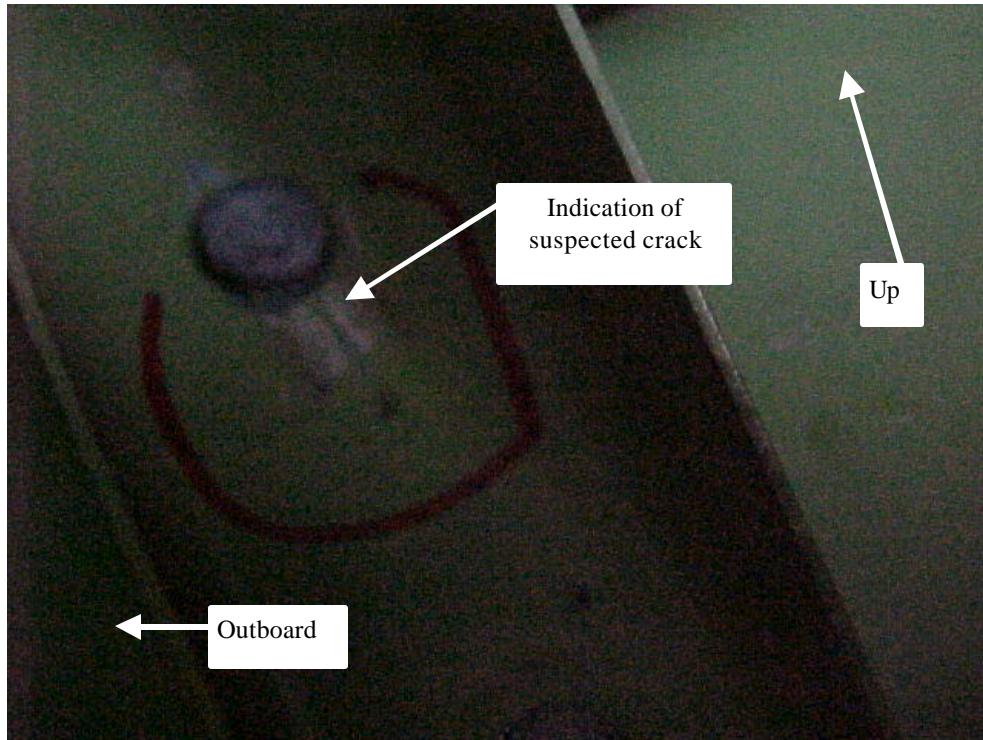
Photograph of stringer clip at FS 720A, stringer 4L. Detailed visual inspection discovered an indication.
